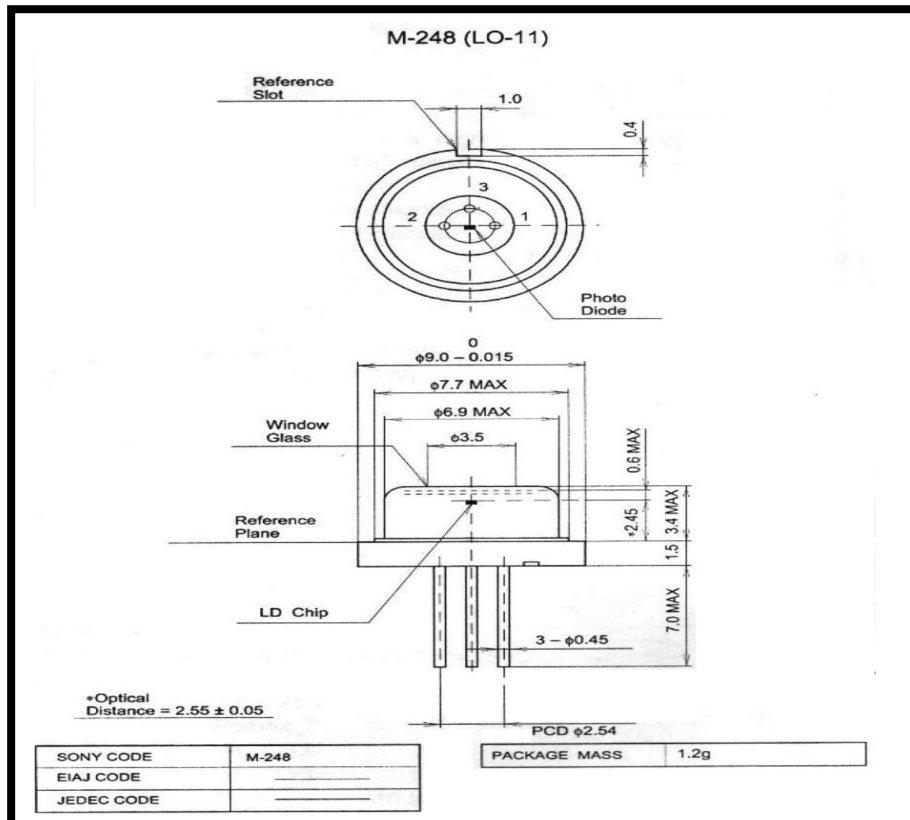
the mechanical dimensions of the QW laser diode, units mm, [47].
